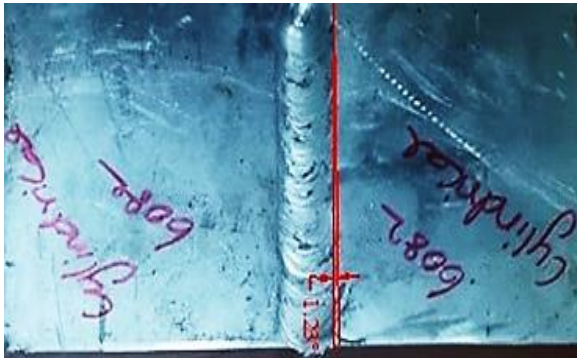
Angle Distortion of Cylindrical Shoulder Tool
